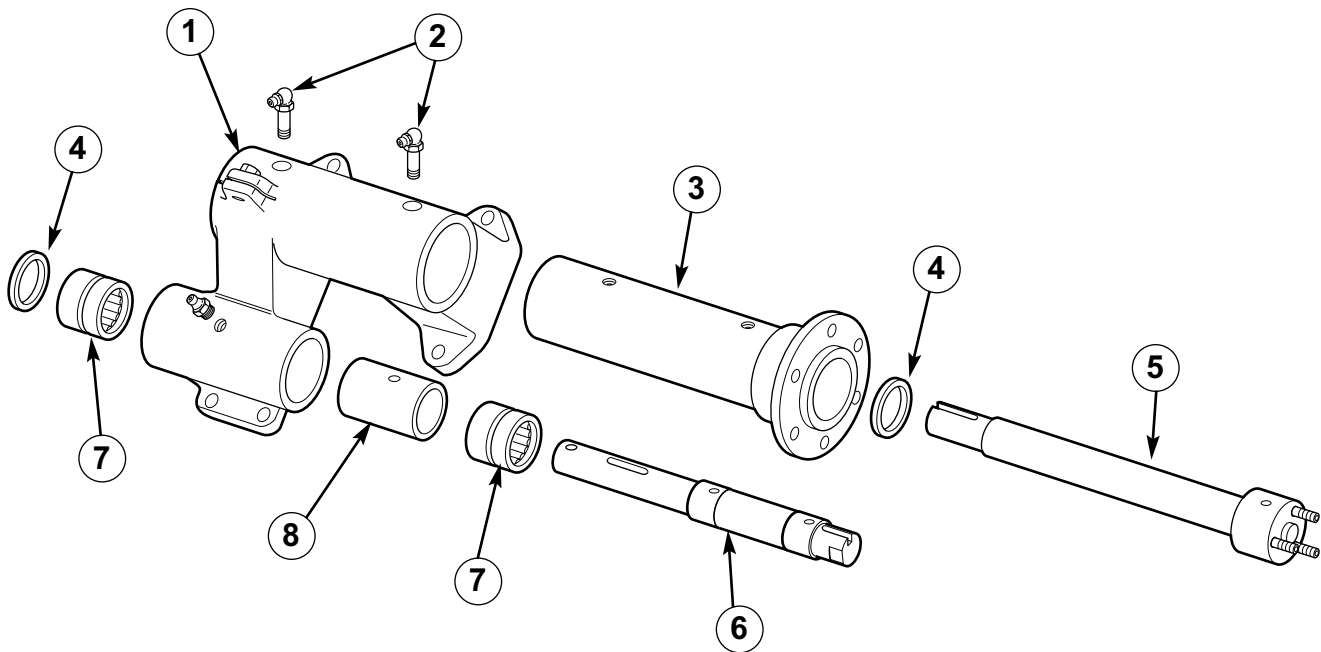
Drive train assembly. (1) Drive Bracket Support Casting, (2) Lubrication Fittings, (3) Impeller Shaft Housing, (4) Thrust Washer, (5) Impeller Shaft, (6) Dicer Drive Shaft, (7) Roller Bearing, (8) Bearing Spacer.
